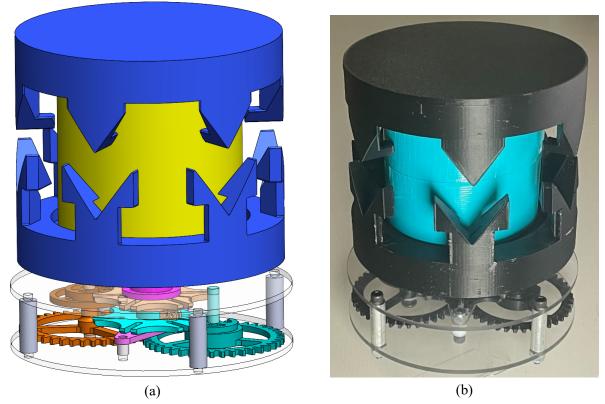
(a) CAD model of Build Design. (b) Physical prototype of Build Design
